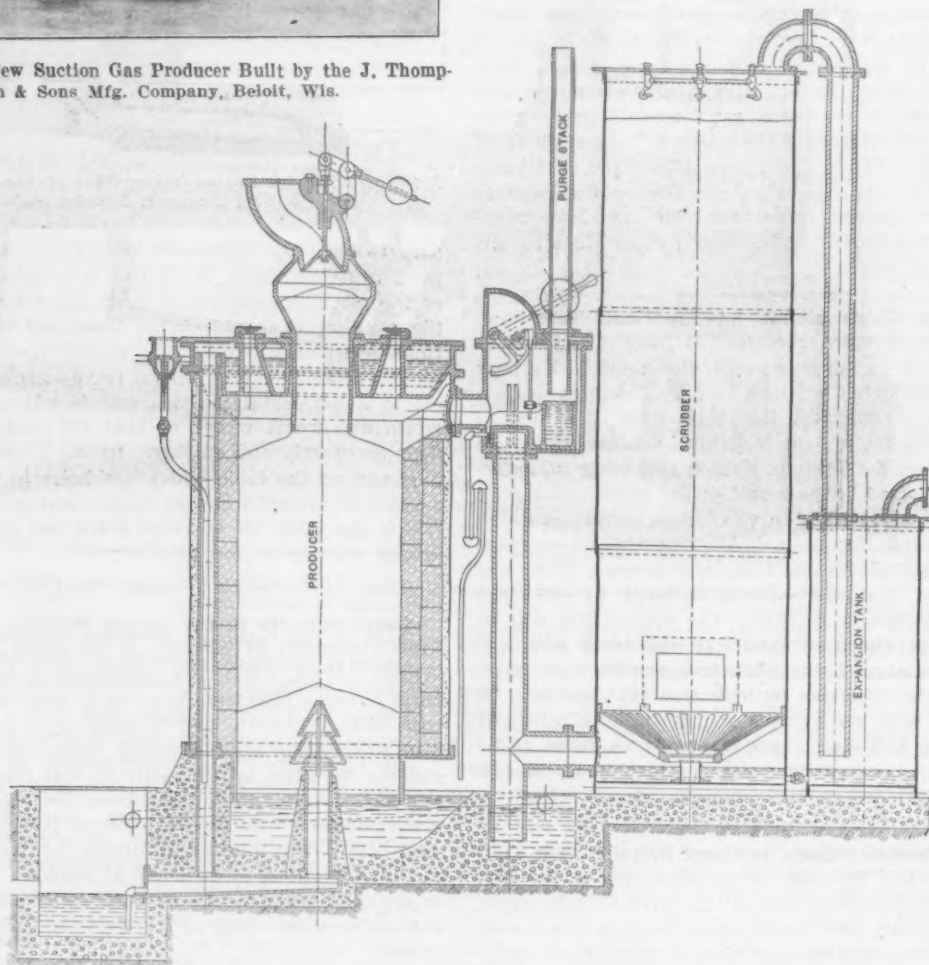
Sectional View of the Thompson Suction Gas Producer and Auxiliaries.
